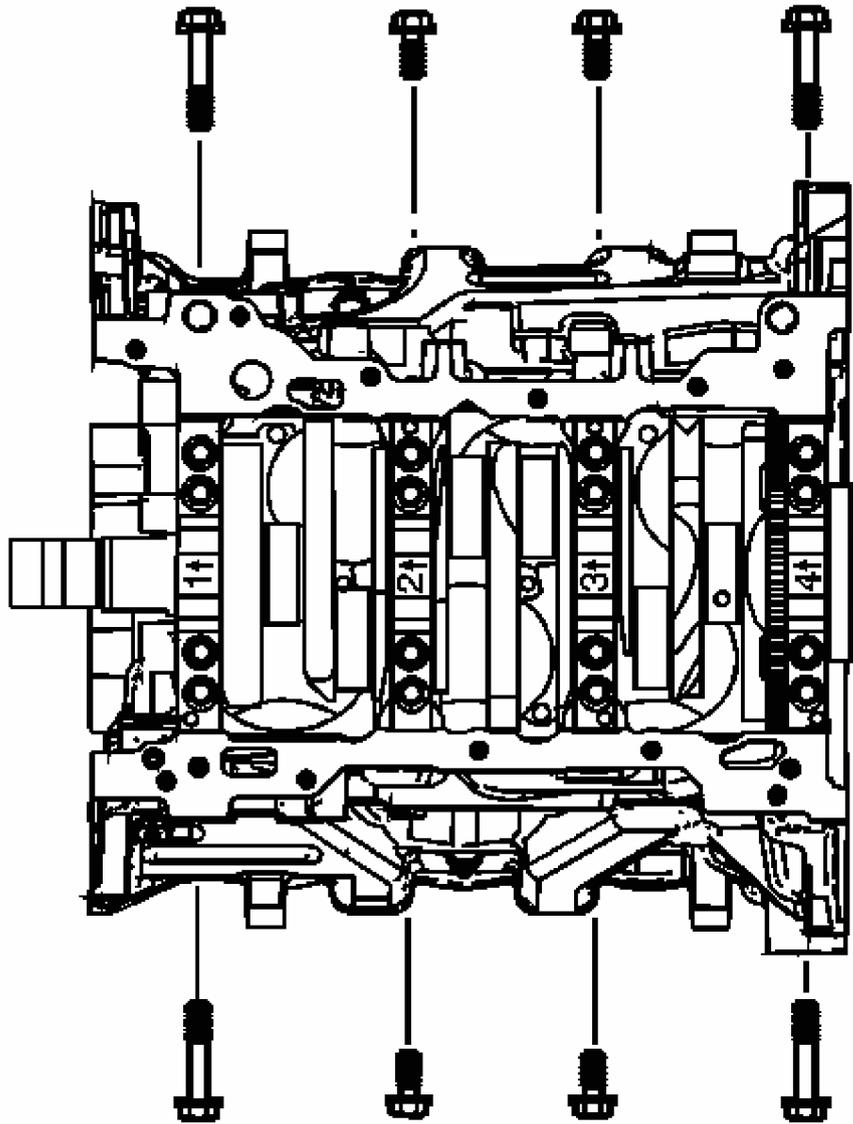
Identifying Crankshaft Main Bearing Cap Side Bolts
